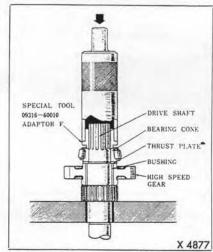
Installing the cone of front tapered roller bearing on the transfer drive shaft with special tool.
